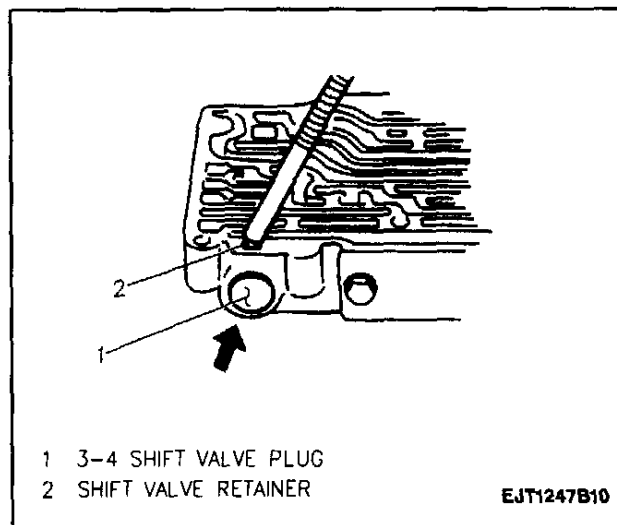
Removing 3-4 Shift Valve Plug (03-72LE, 4-Speed)
